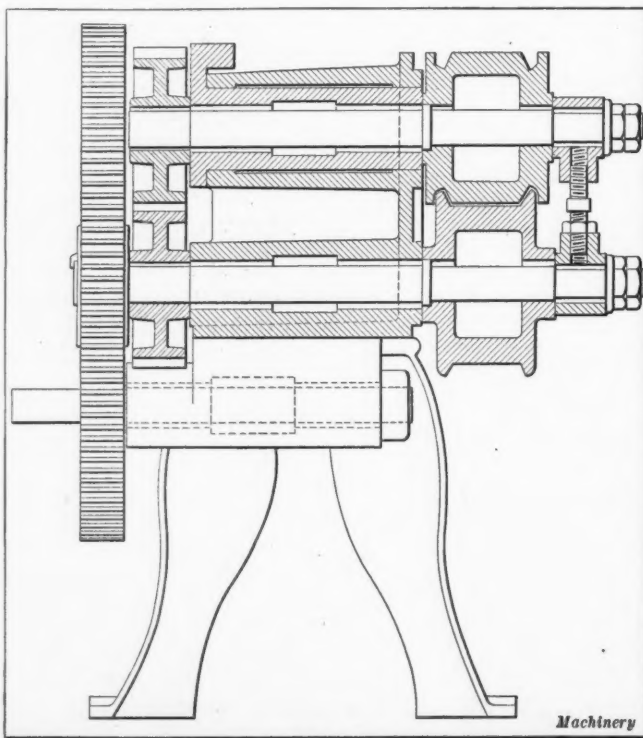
Sectional View through Channeling Machine to show Roll Construction
